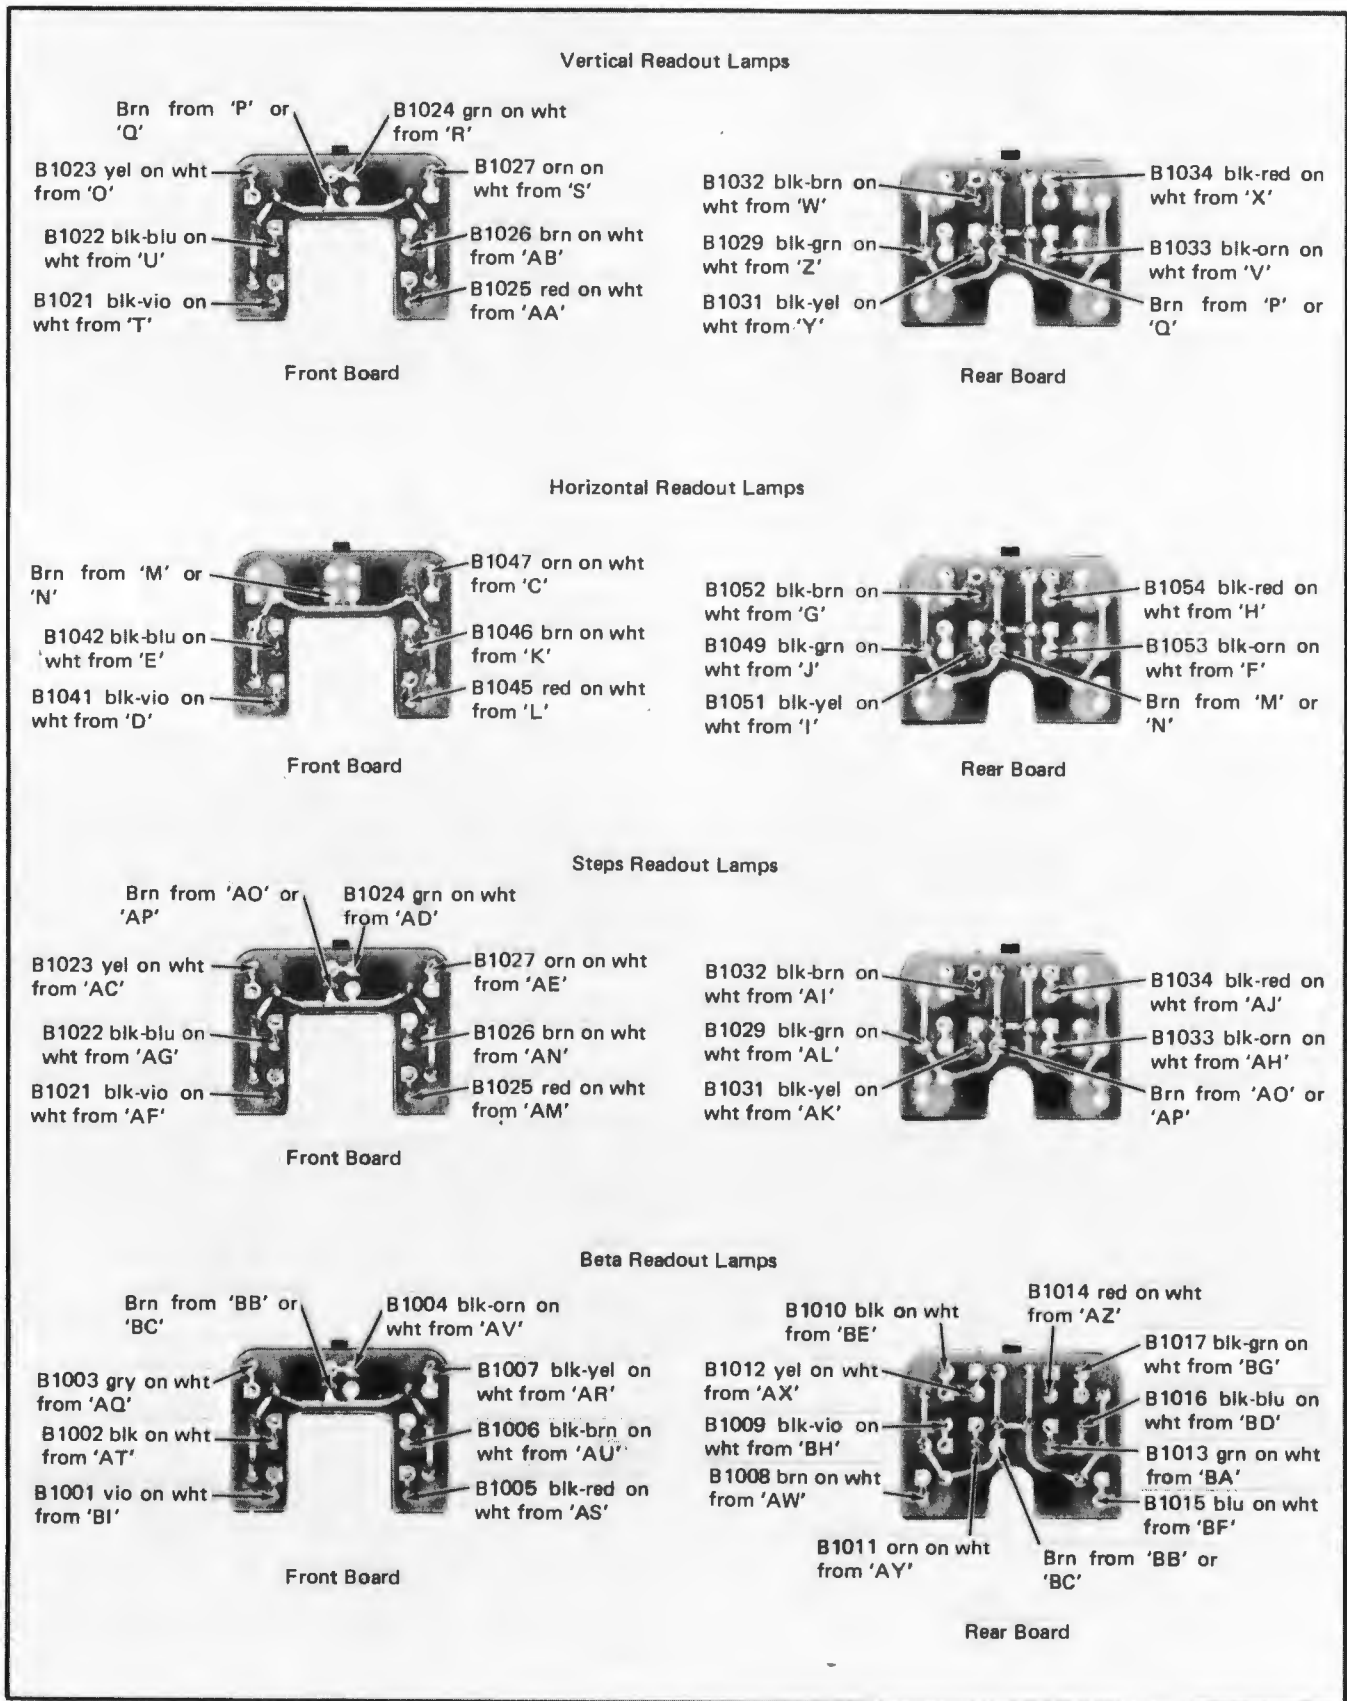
Component locations and wiring color codes on Readout Lamp circuit boards.
